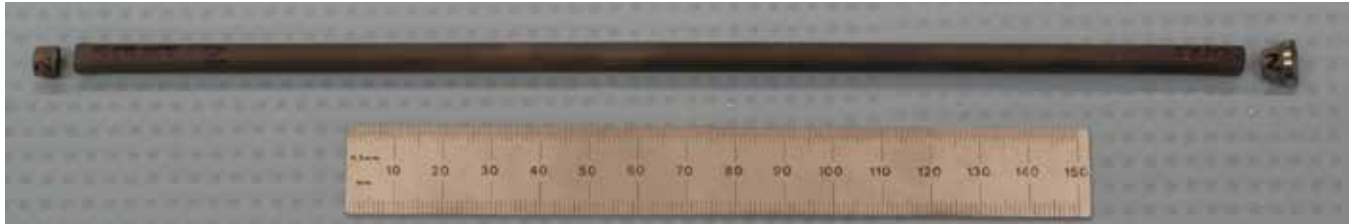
Image showing 14YWT tube after extrusion to 230 mm in length at CWRU using hydrostatic extrusion.
